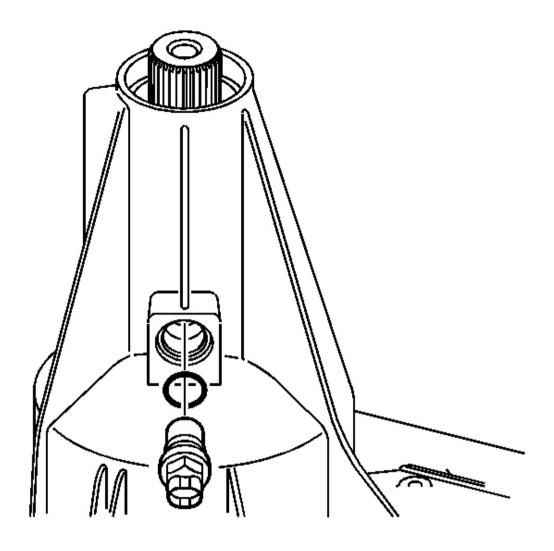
Locating Vehicle Speed Sensor (VSS) Courtesy of GENERAL MOTORS CORP.
